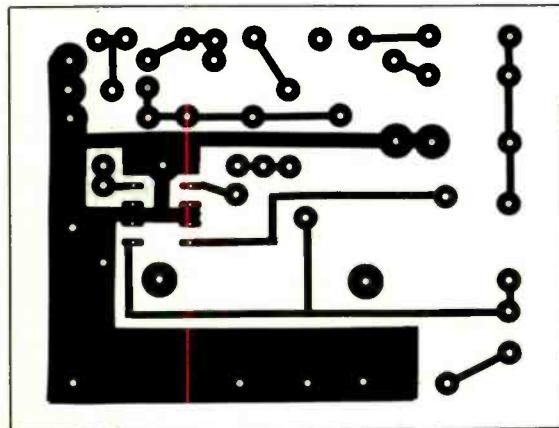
The actual-size etching-and-drilling guide to use for fabricating a printed-circuit board.
